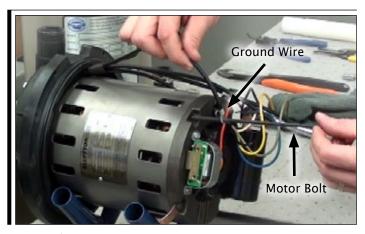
| Install bulkhead ground wire to motor under the motor bolt located to the left of motor lead wire assembly. Tighten the motor bolts using torque wrench in a cross pattern.
